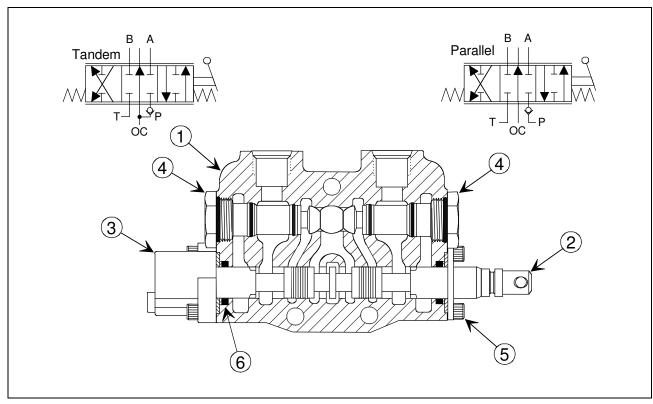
4-Way, 3-Position Parallel & Tandem Work Sections (Tandem Housing Shown Here)
